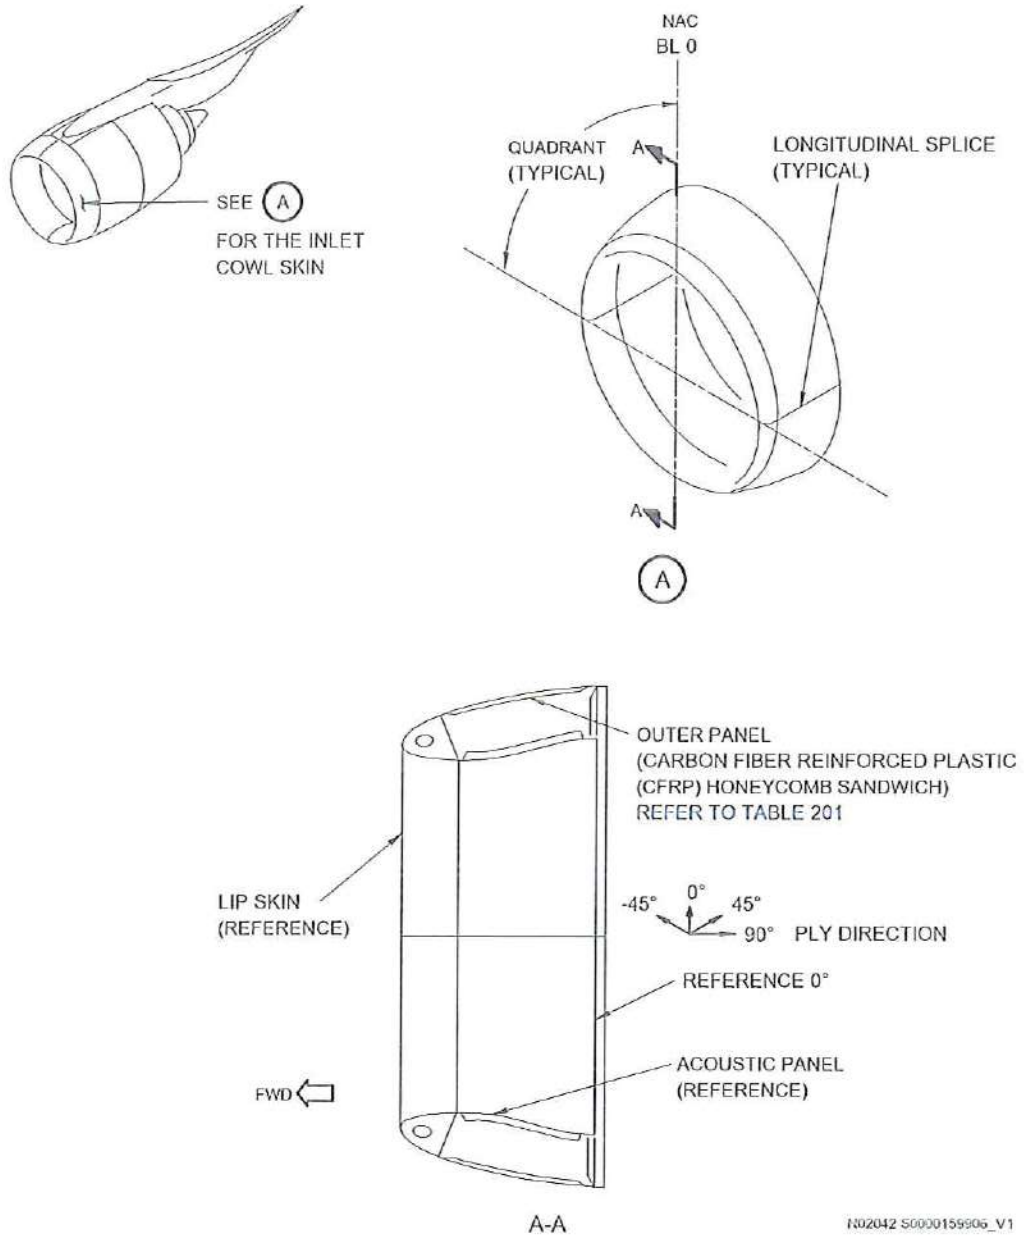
Inlet Cowl Outer Barrel Panel Location - GE90-100 Series Engine - Sheet 1
